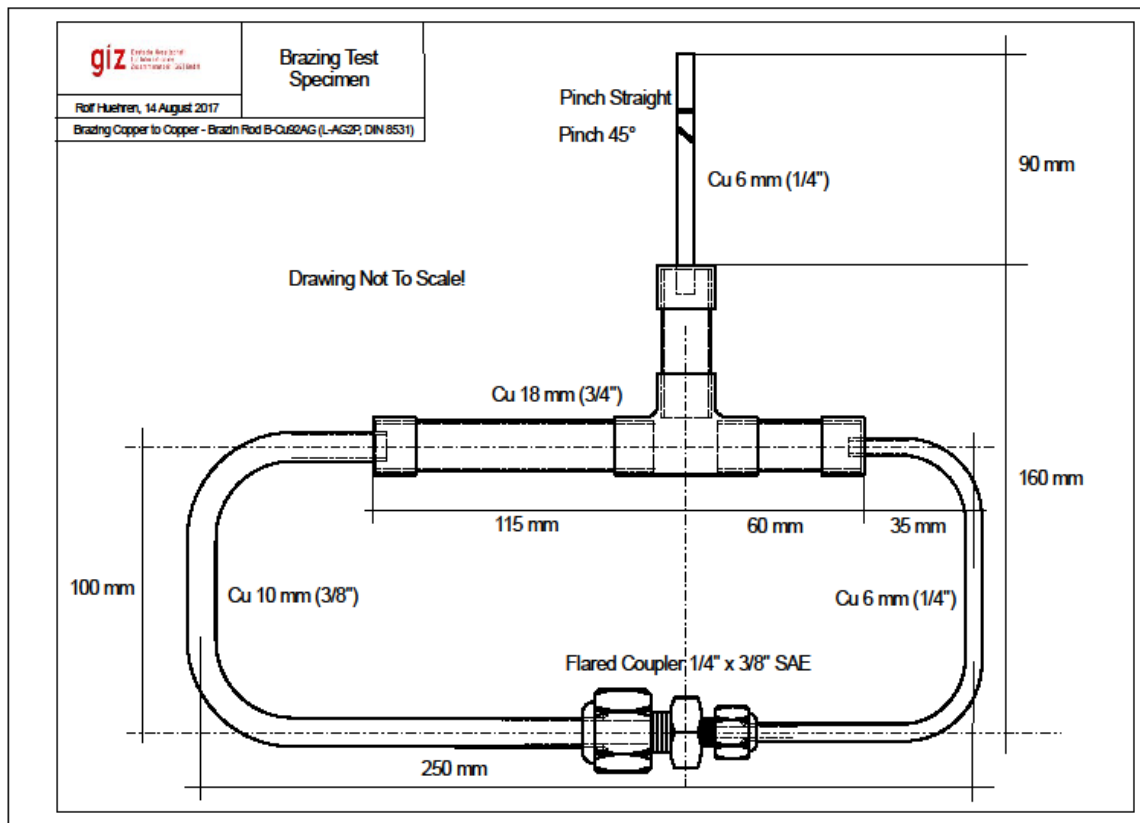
Drawing of "Brazing Test Specimen" for brazers' certification (Source: HEAT GmbH)
